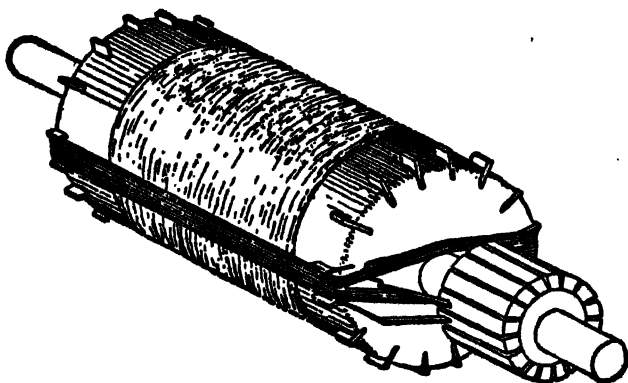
Illustrating the principle of diametrical or Siemens' drum winding. In order to make the winding and connections clear, one coil and the commutator is shown assembled, although the latter is not put in place until after all the sections have been wound, the ends of the wires being temporarily twisted together until all can be soldered to the risers. The cores of these early machines were of wood overspun circumferentially with iron wire before receiving the longitudinal copper windings.
